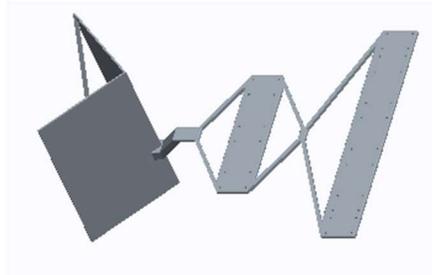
Armor Assembly Attached to the Frame ASM-003 and ASM-001.
